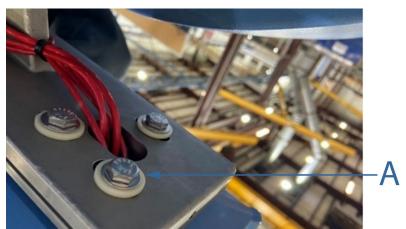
Electronic bracket with bolts for Base Enclosure
